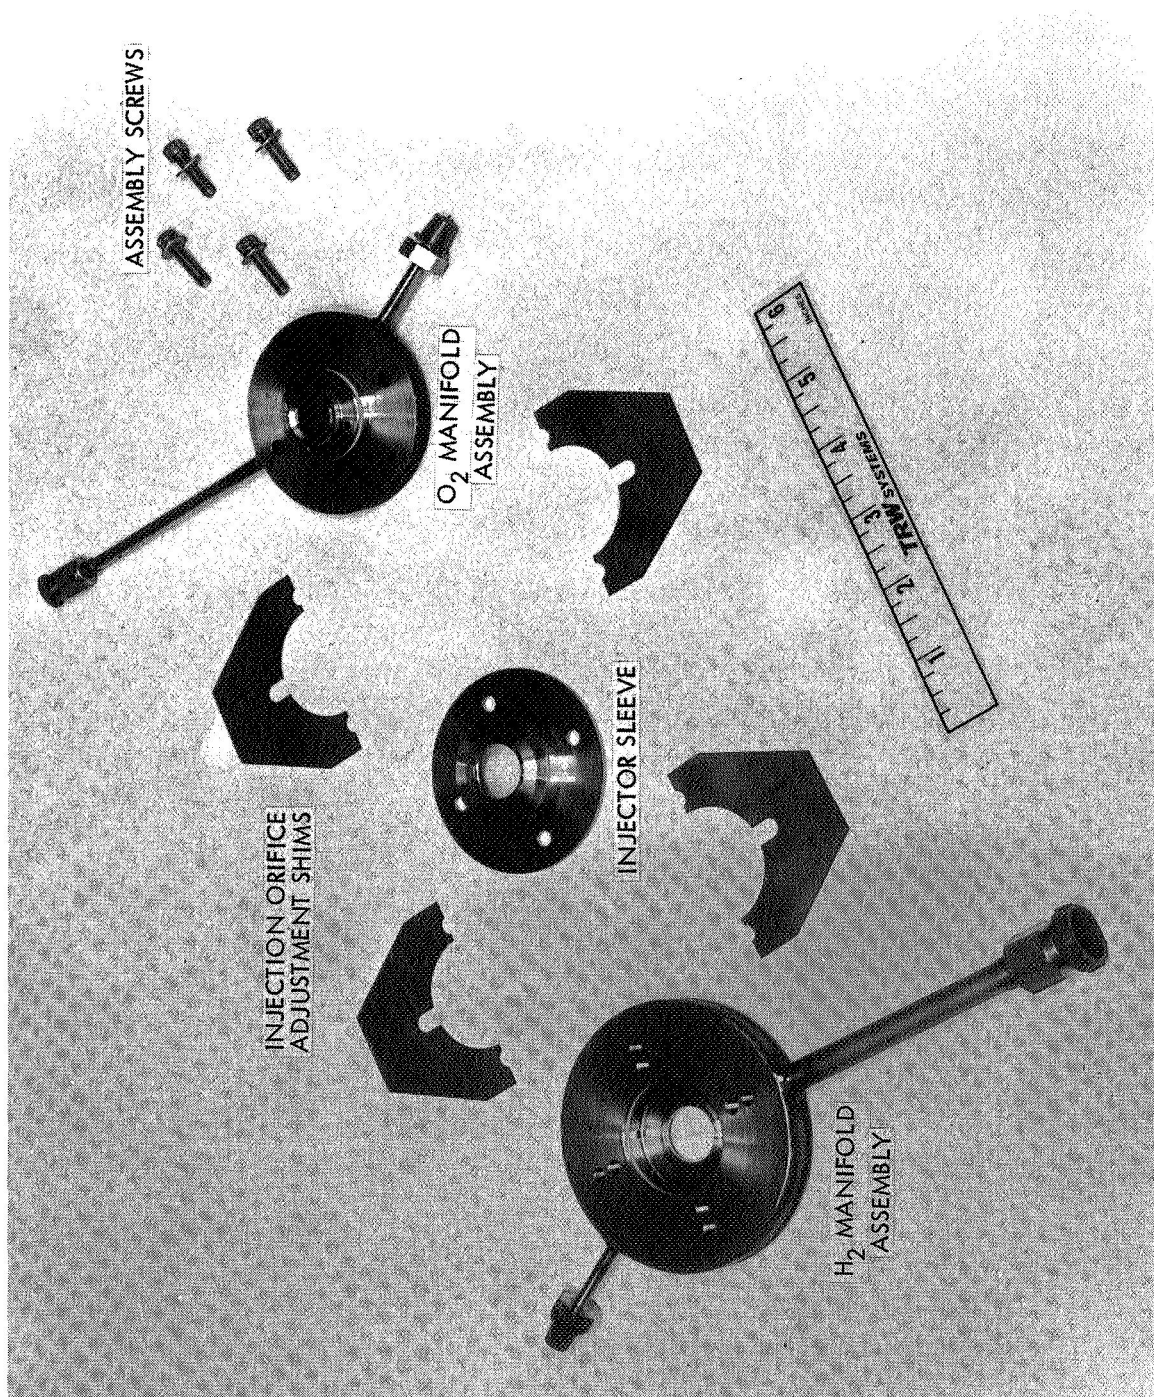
Disassembled Injector—High Chamber Pressure Thruster
